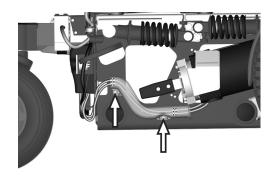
The drive motor cable and the wheel lock cable are held in place with a cable cover.
